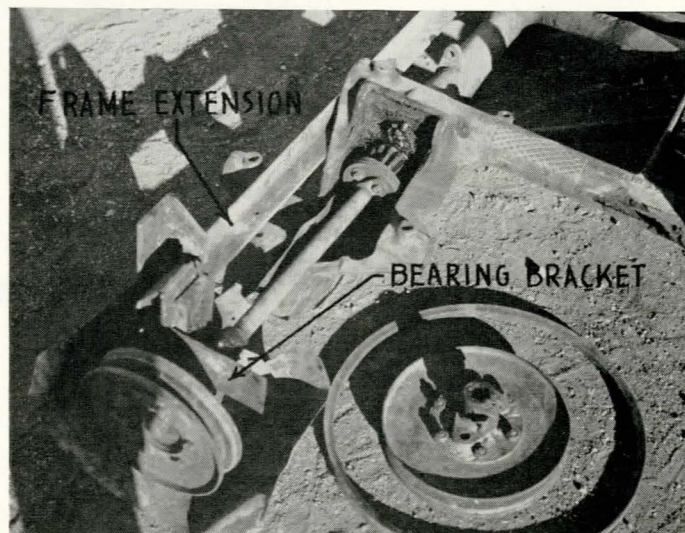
The pulley end of the drive shaft rotates in a self aligning one-inch roller bearing which is supported by an adjustable bracket as in Figure 8. This bracket is mounted on a support in such a manner as to provide an up and down adjustment to permit the necessary belt adjustment. In all cases make supports extra strong as all mowers have a tendency to vibrate.
